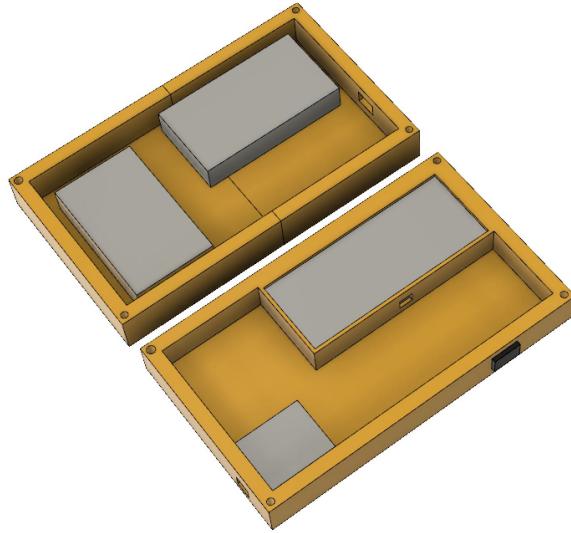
Full board housing that holds the PCB boards, including the microcontroller, the batteries, and the Adafruit 259 battery charger. CAD done in Fusion360.
